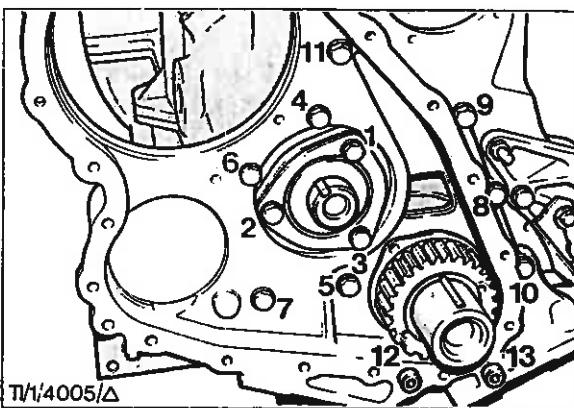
Timing Gear Housing Bolt Tightening Sequence - 4 Cylinder Engines
